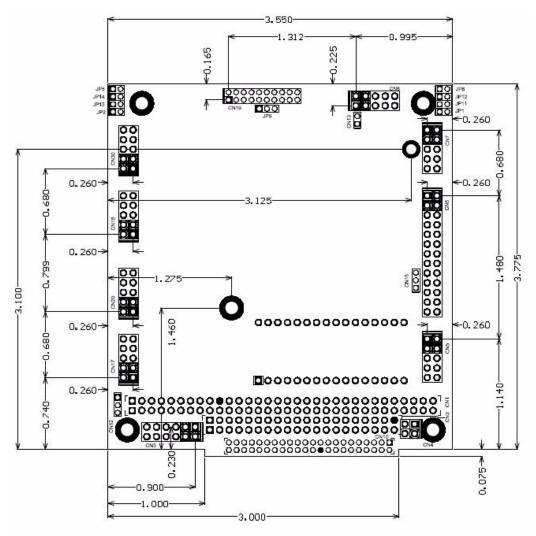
CME136686LX Physical Dimensions (±0.005 inches)
